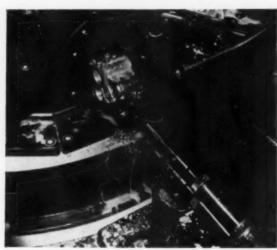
Though most tools are mounted on the main vertical slide, these machines use some side heads. At this station, two stepped taps are driven by side heads.
